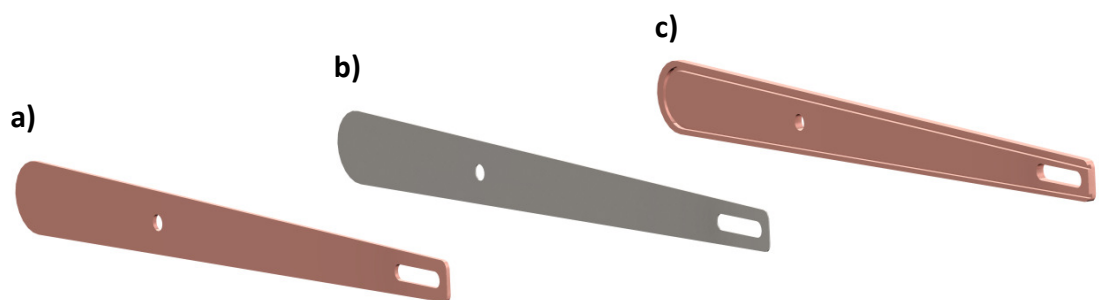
a) Cover, b) gasket and c) base of the heat sink assembly
